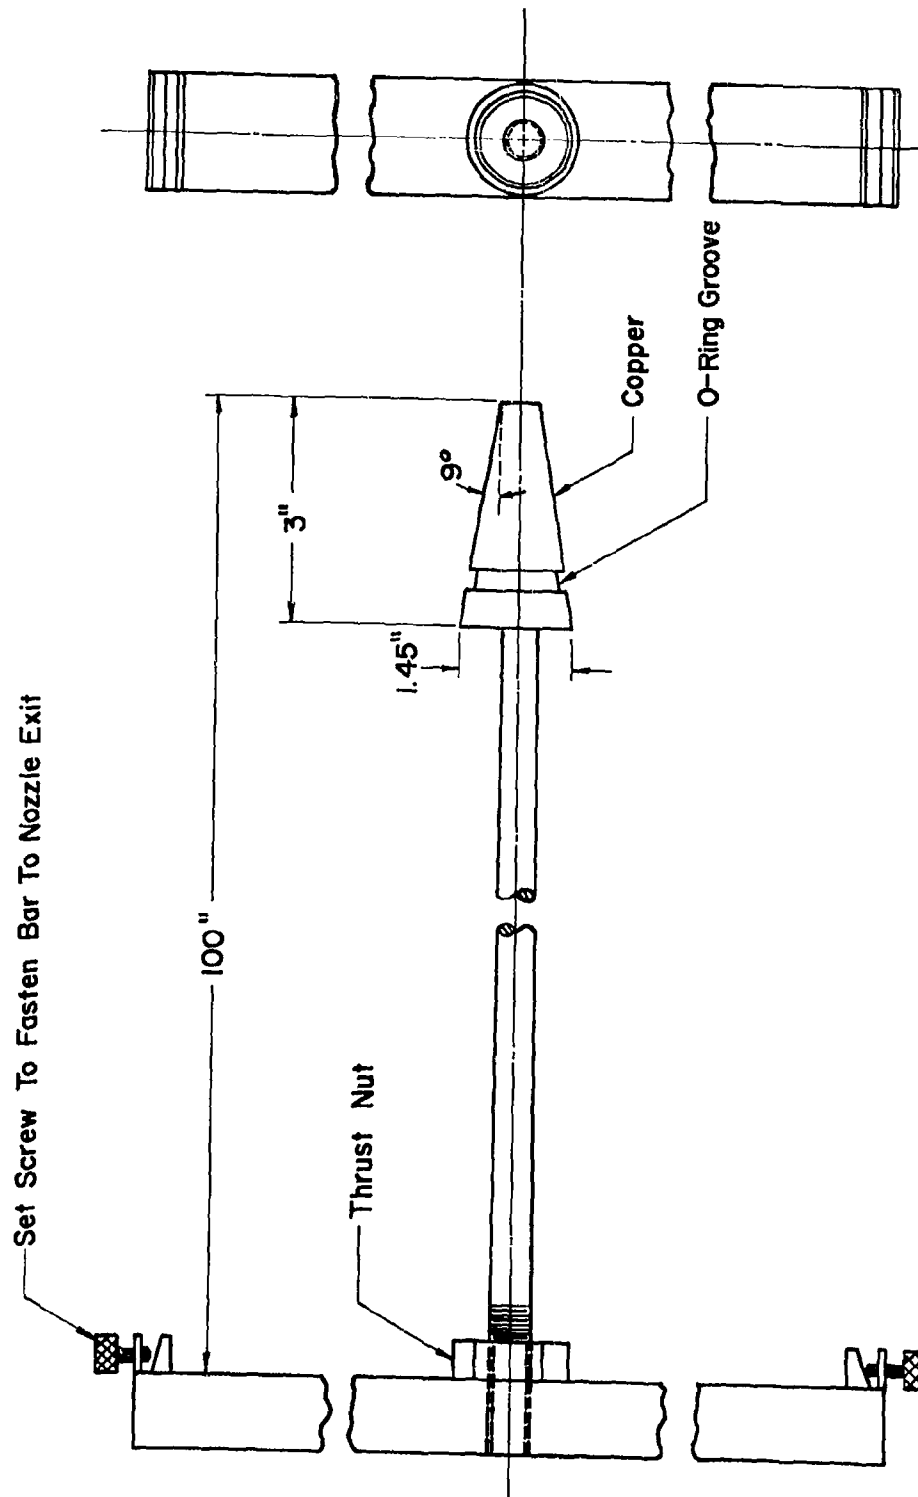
NOZZLE PLUG DIMENSIONS
